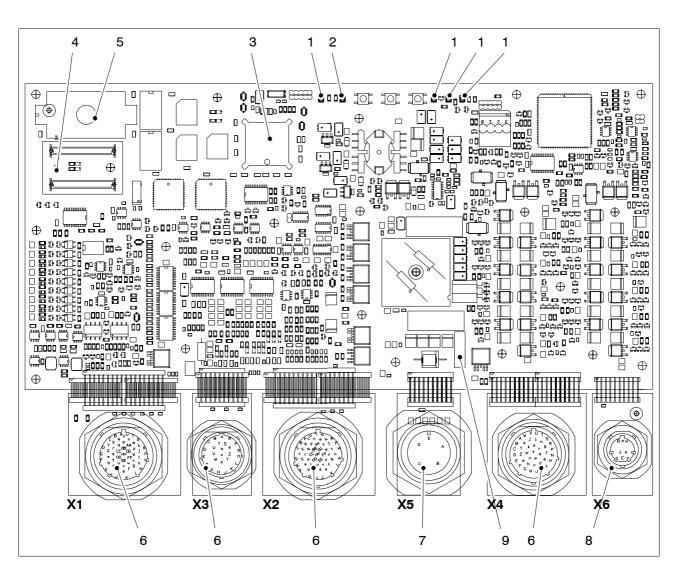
Configuration of the electronic components on printed circuit board ECB 4-01
